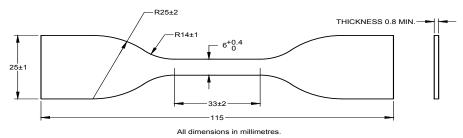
DIMENSIONS OF DUMB-BELL TEST PIECE
